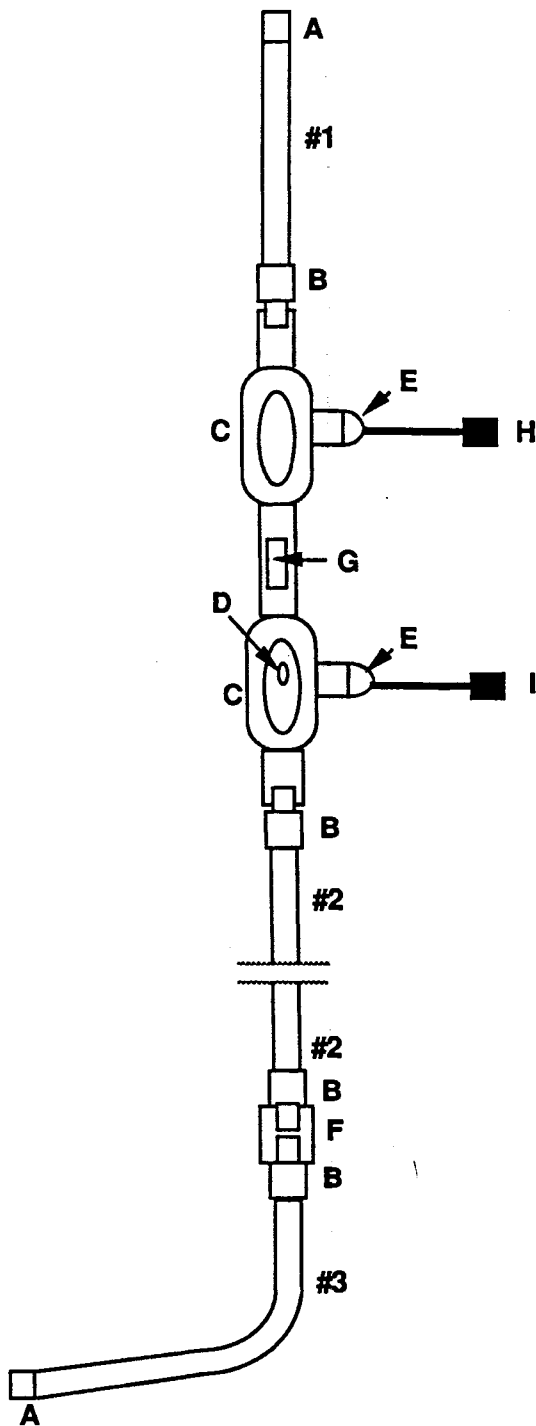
Proximal probe assembly (not to scale). A = 1/2-in. copper pipe caps; B = 1/2-in. NPT x 3/8-in. I.D. tube fitting; C = 1/2-in. aluminum conduit-T; D = 1/2-in. hole in conduit-T cover; E = UF connector; F = 1/2-in. threaded PVC coupler; G = 1/2-in. close nipple (steel); H = male cord cap; I = female cord cap; #1 = 18 3/4-in. piece of copper tubing; #2 = 24-in. piece of copper tubing; #3 = 24-in. piece of copper tubing (see Appendix 1).
